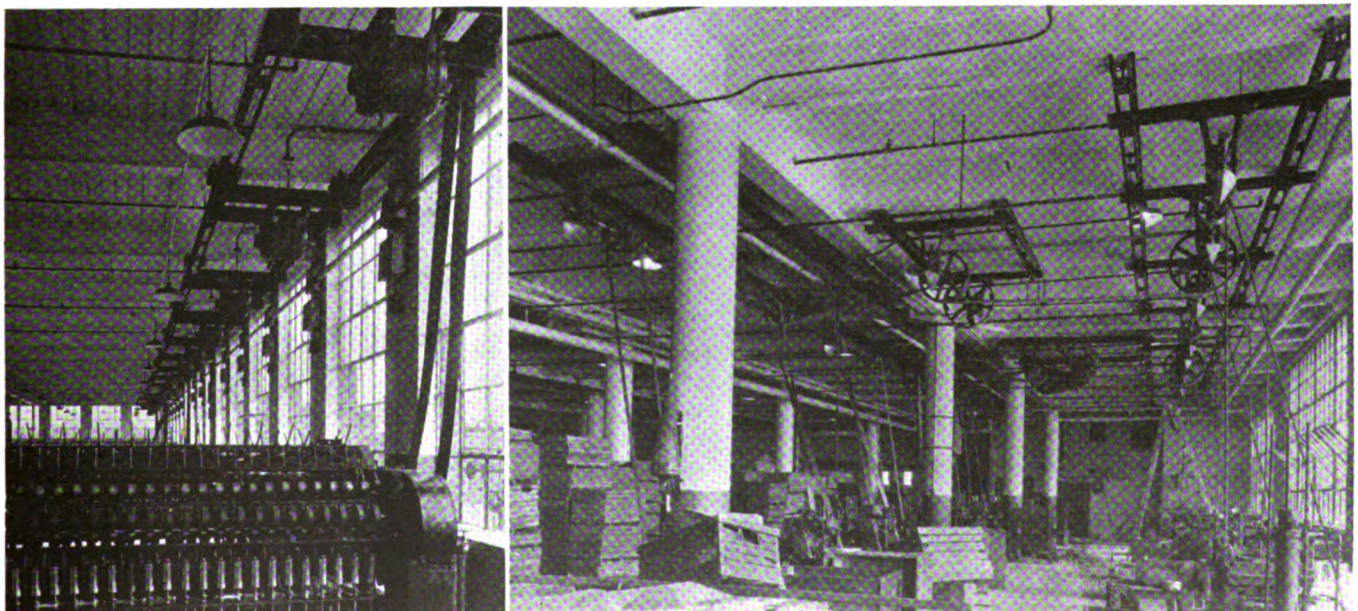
and 9—Here is a neat-appearing method of mounting motors and lineshafts.
